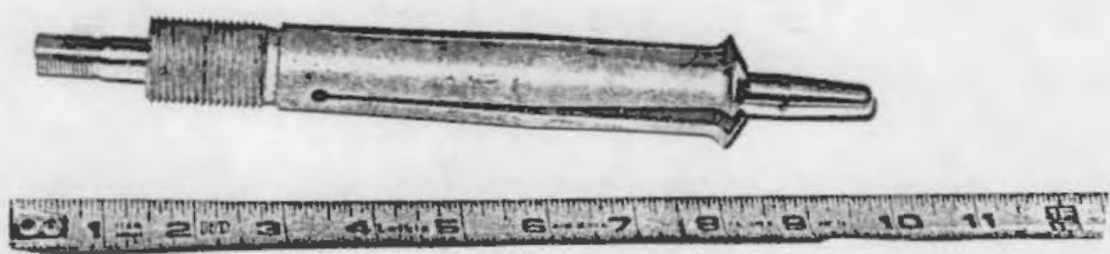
Push Rod Inserted into Bit To Expand Spalling Wedge
